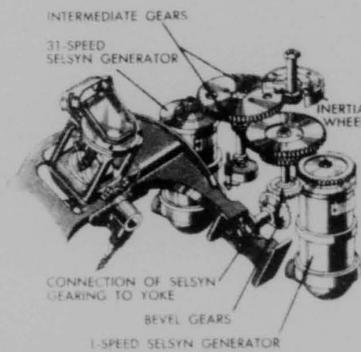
Yoke Connected to Elevation Selsyn Generator Assembly.
